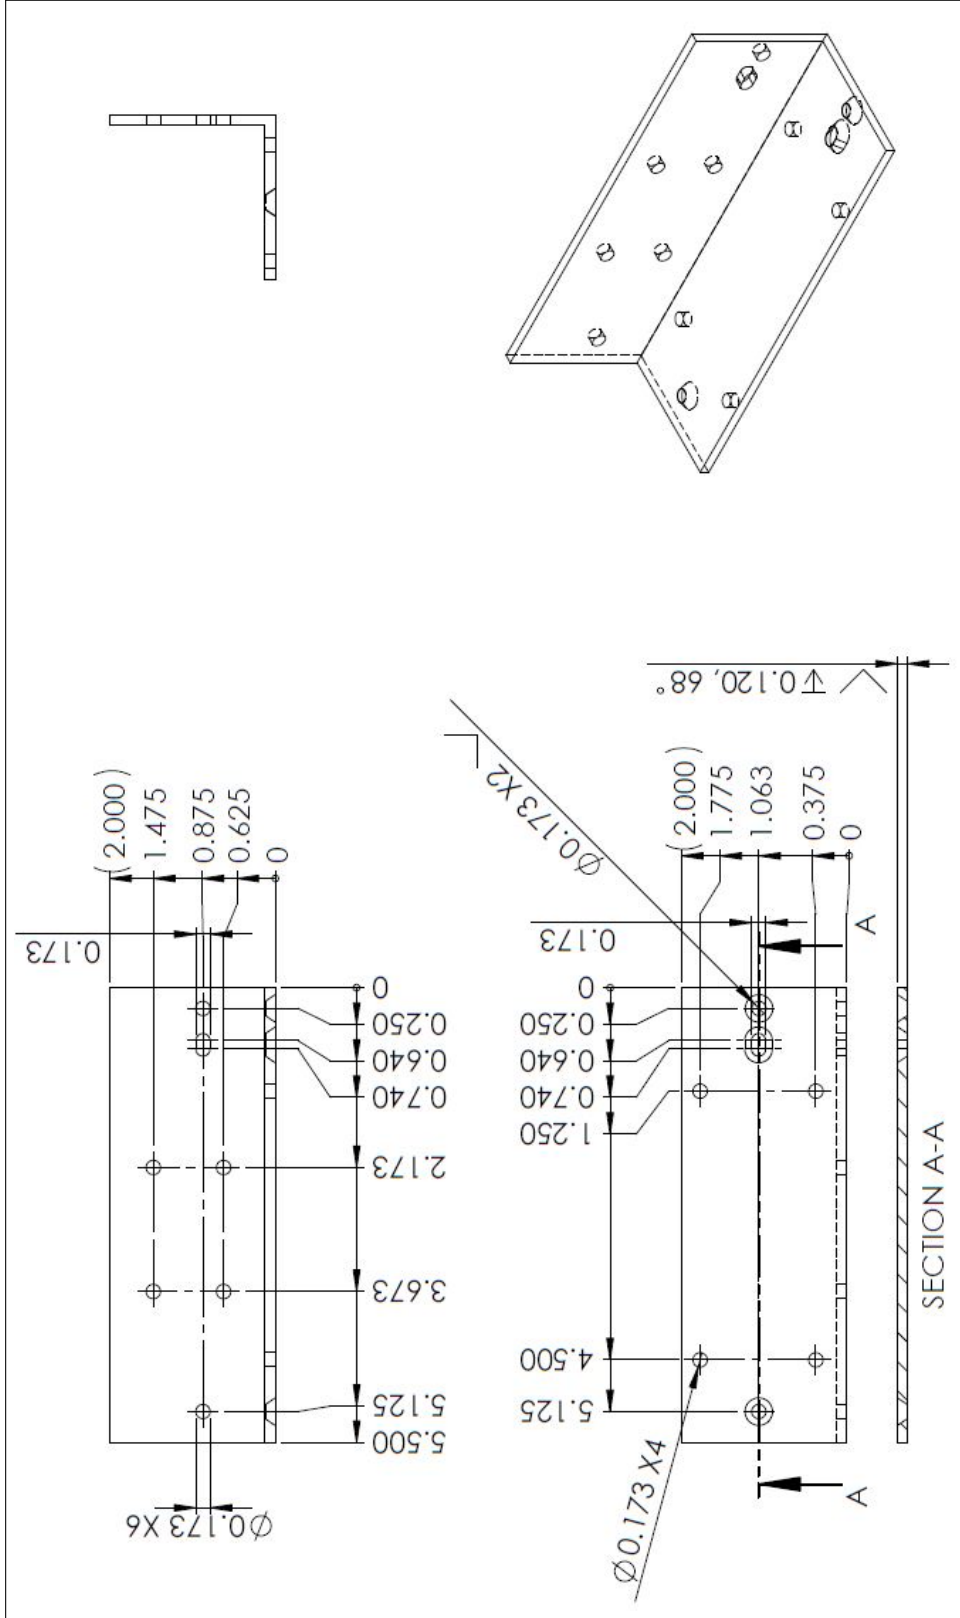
Force Input Device - Mounting Angle Detail. Material: Aluminum. UNLESS OTHERWISE SPECIFIED, ALL DIMENSIONS ARE IN INCHES.
